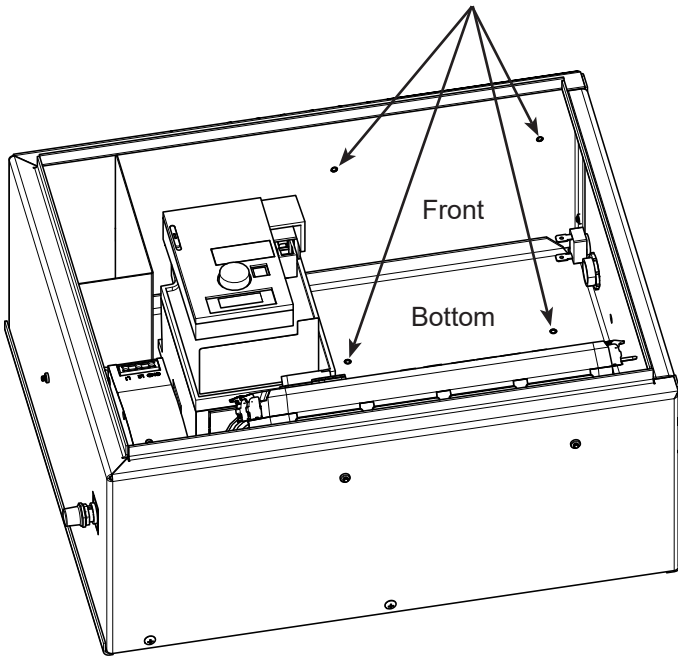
SmartTouch 720/725 I/O Expansion Module Mounting Holes
